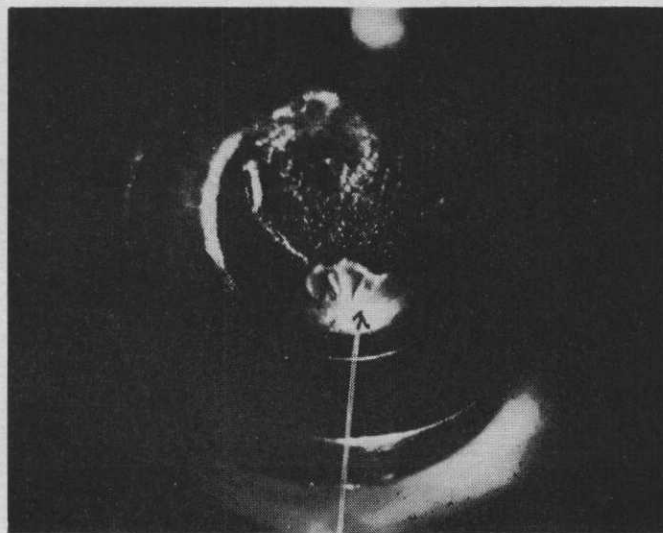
Photograph of the fracture face showing dent marks in another aero-engine fuel pump drive-shaft. X4
